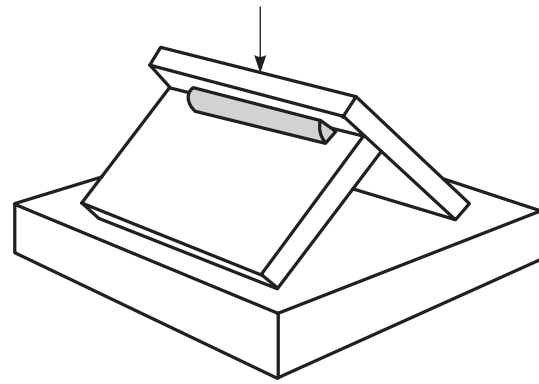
Method of Fracturing Fillet Weld Break Specimen—Tack Welder Qualification
